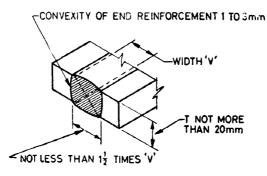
BUTT WELDS END REINFORCEMENT
